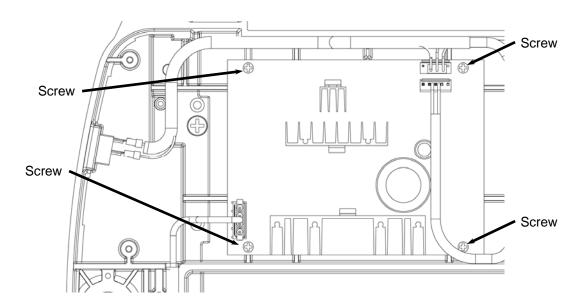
POWER SUPPLY ATTACHMENT SCREWS
